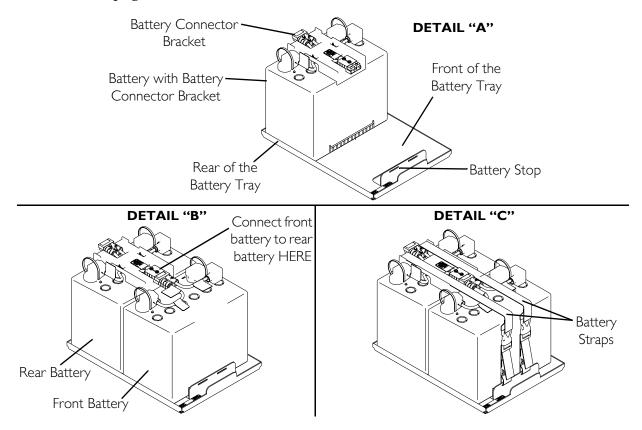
Installing Batteries into Wheelchairs without Elevate
